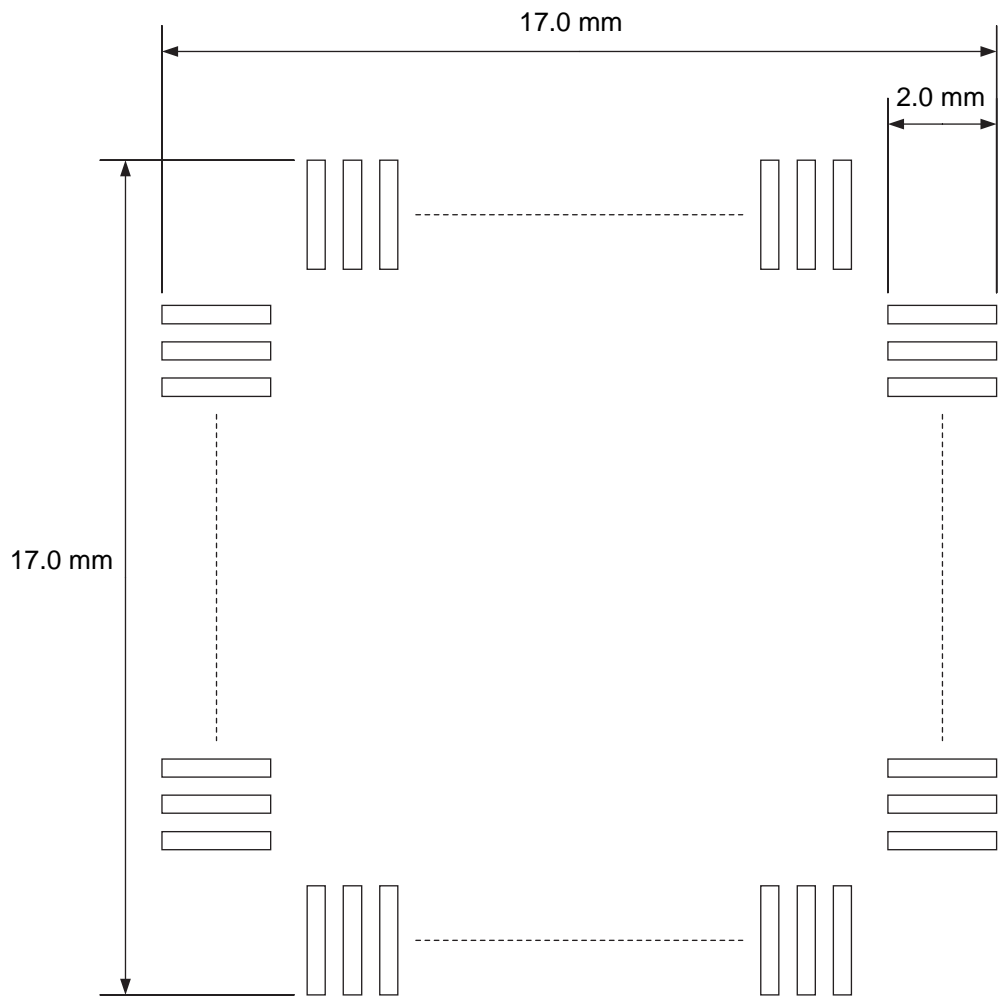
Recommended dimensions of the footprint for mounting the LQFP-100P IC socket
